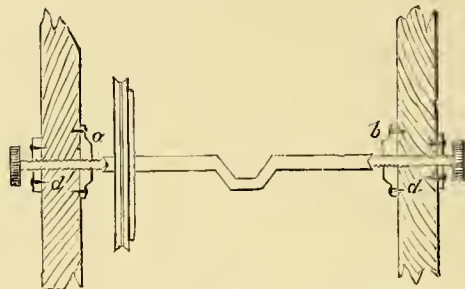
SECTION SHOWING AXLE HUNG ON ONE BOLT AND READY TO BE SCREWED UP WITH THE OTHER.
